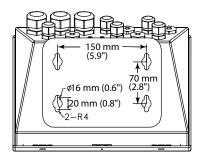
Bottom View and Mounting Hole Locations for the IND310drive
